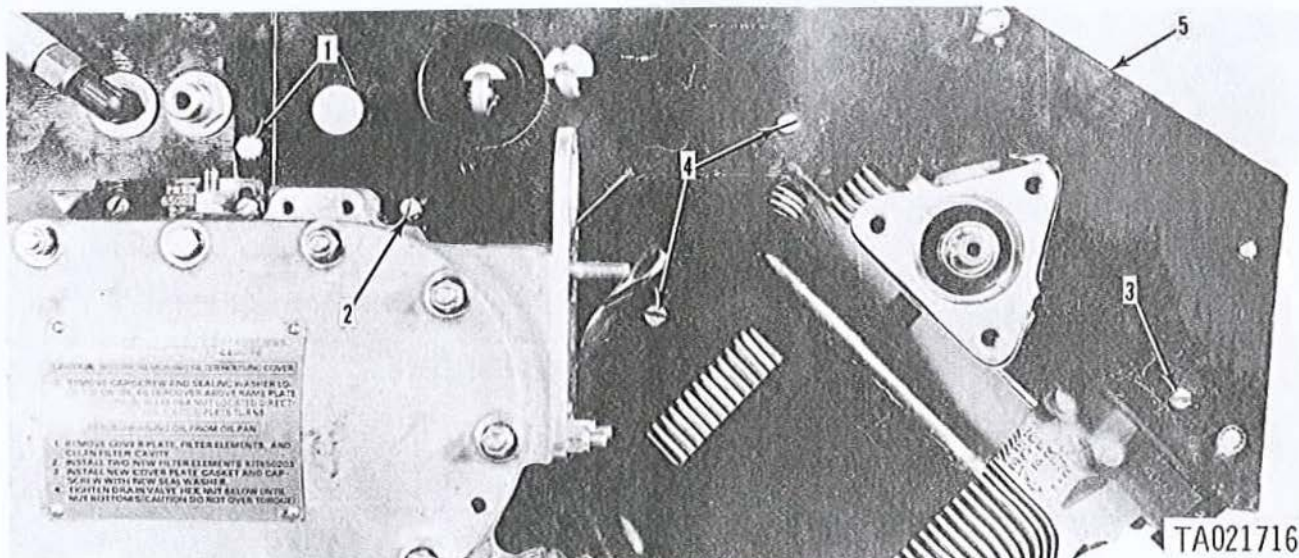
Removing or installing No. 1R cylinder barrel shroud.
